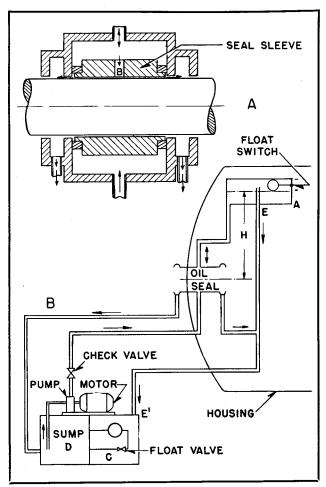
(A) Sectional View of Oil Seal (B) Oil Seal Circulating System
